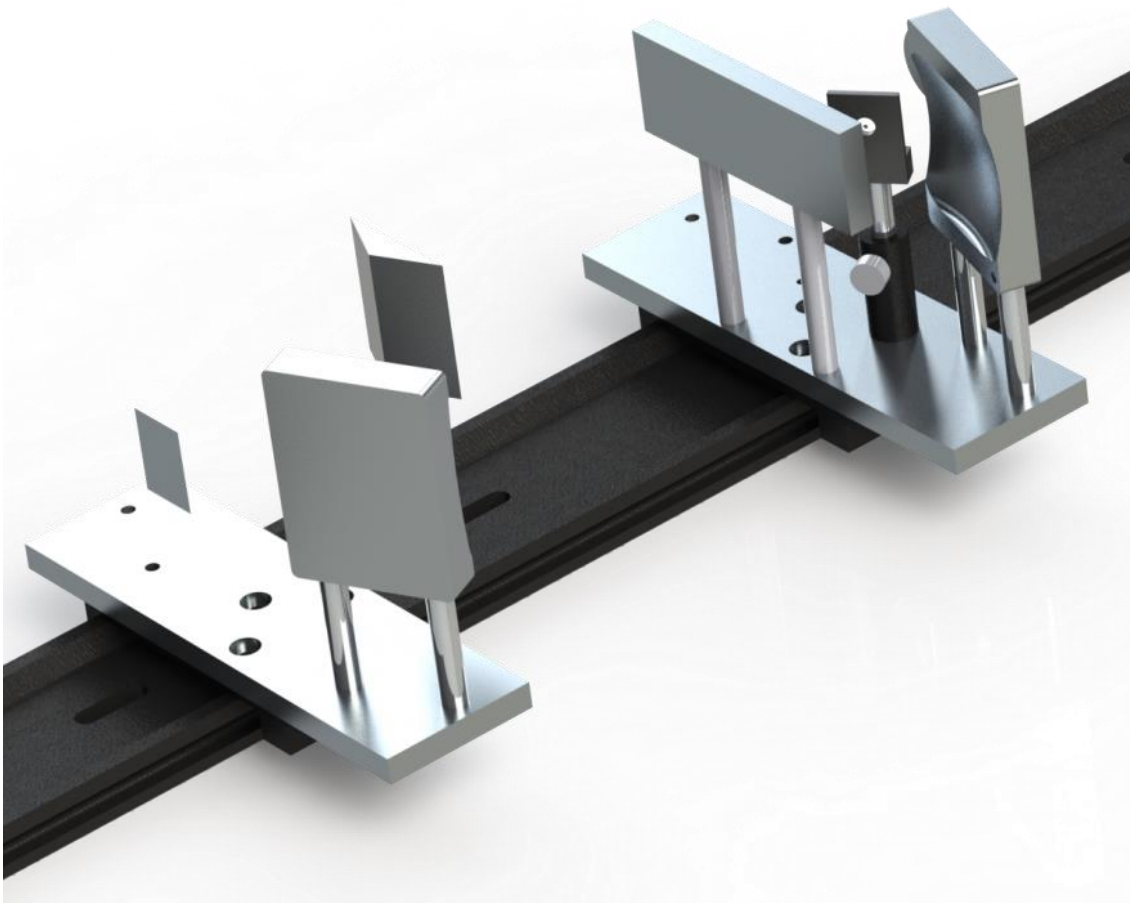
Solid model assembly of the confocal design. Mounting plates and an optical rail are used to secure the components.
